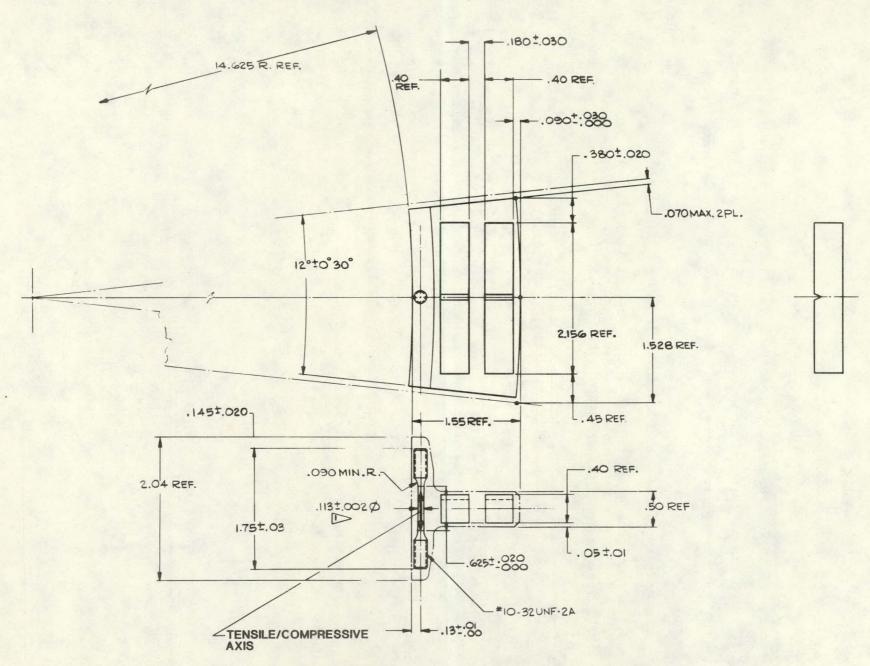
Mechanical Property Specimen Location in 17-4 PH Stainless Steel Seal Casting (1 in = 25.4 cm).
